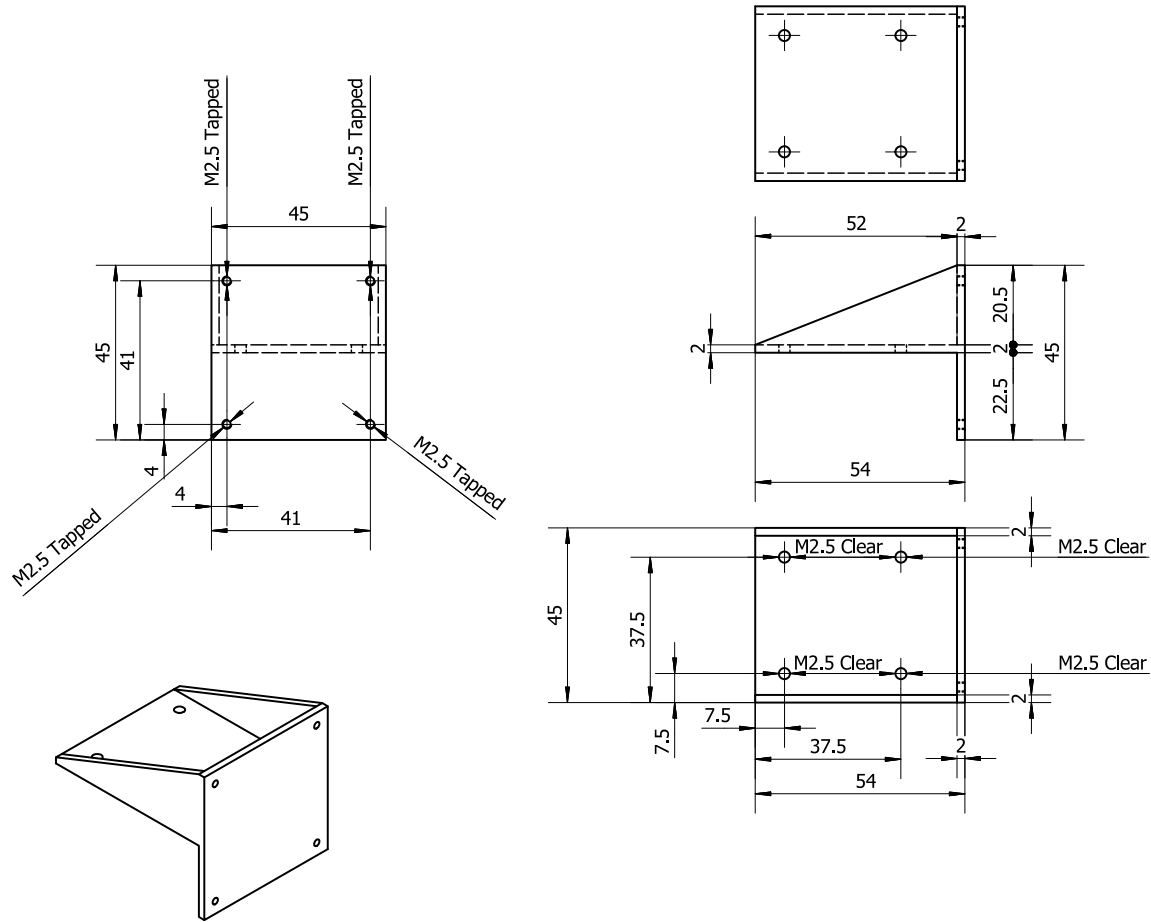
Technical drawing of the corner mount for the piezoelectric stepper stages. Material: invar.
